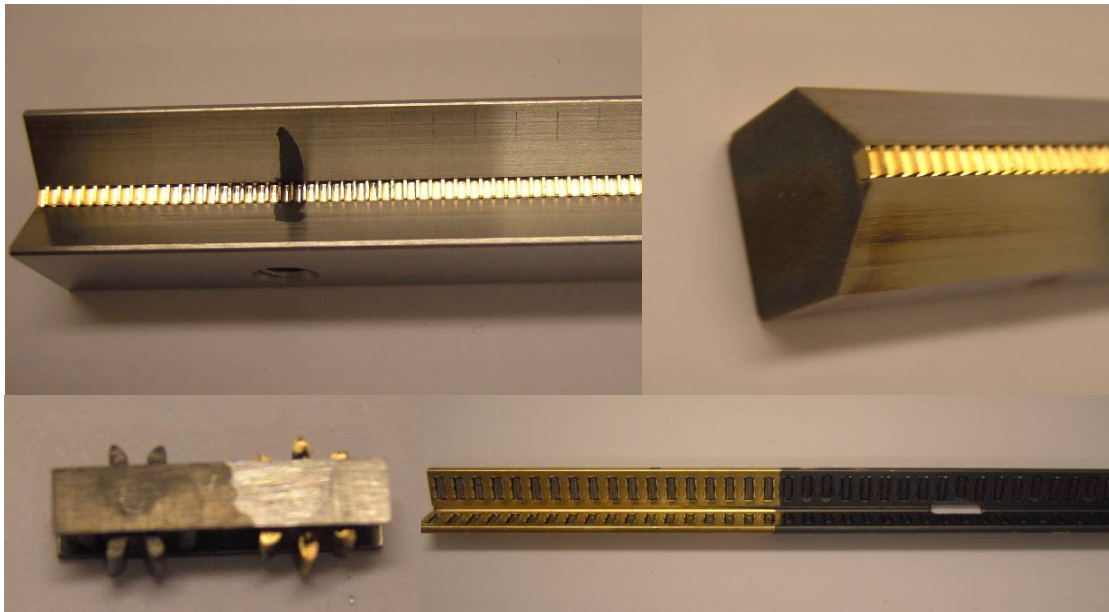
Pictures of the linear bearing ACS system, showing the racks mounted into the rails, the pinion assembly and the needle roller cage with the groove where pinions are inserted
